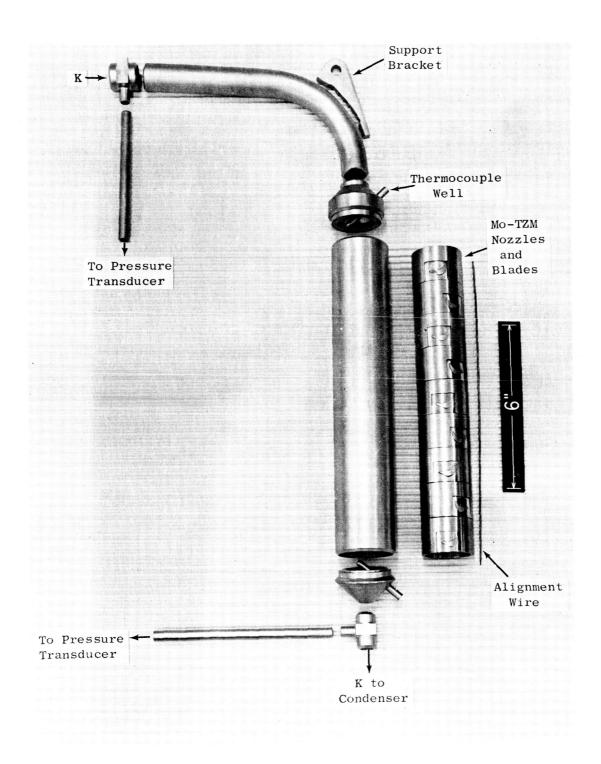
Turbine Simulator (Stages 2-10) of the Prototype Corrosion Loop Prior to Assembly. Nozzles and Blades: Mo-TZM. Tubing, Reducers, Casing and Miscellaneous Fittings: Cb-1Zr.
